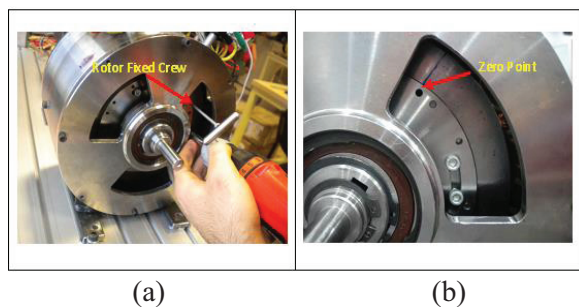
(a) Rotation of rotor for EASM motors, and (b) specially designed rotor disc.
